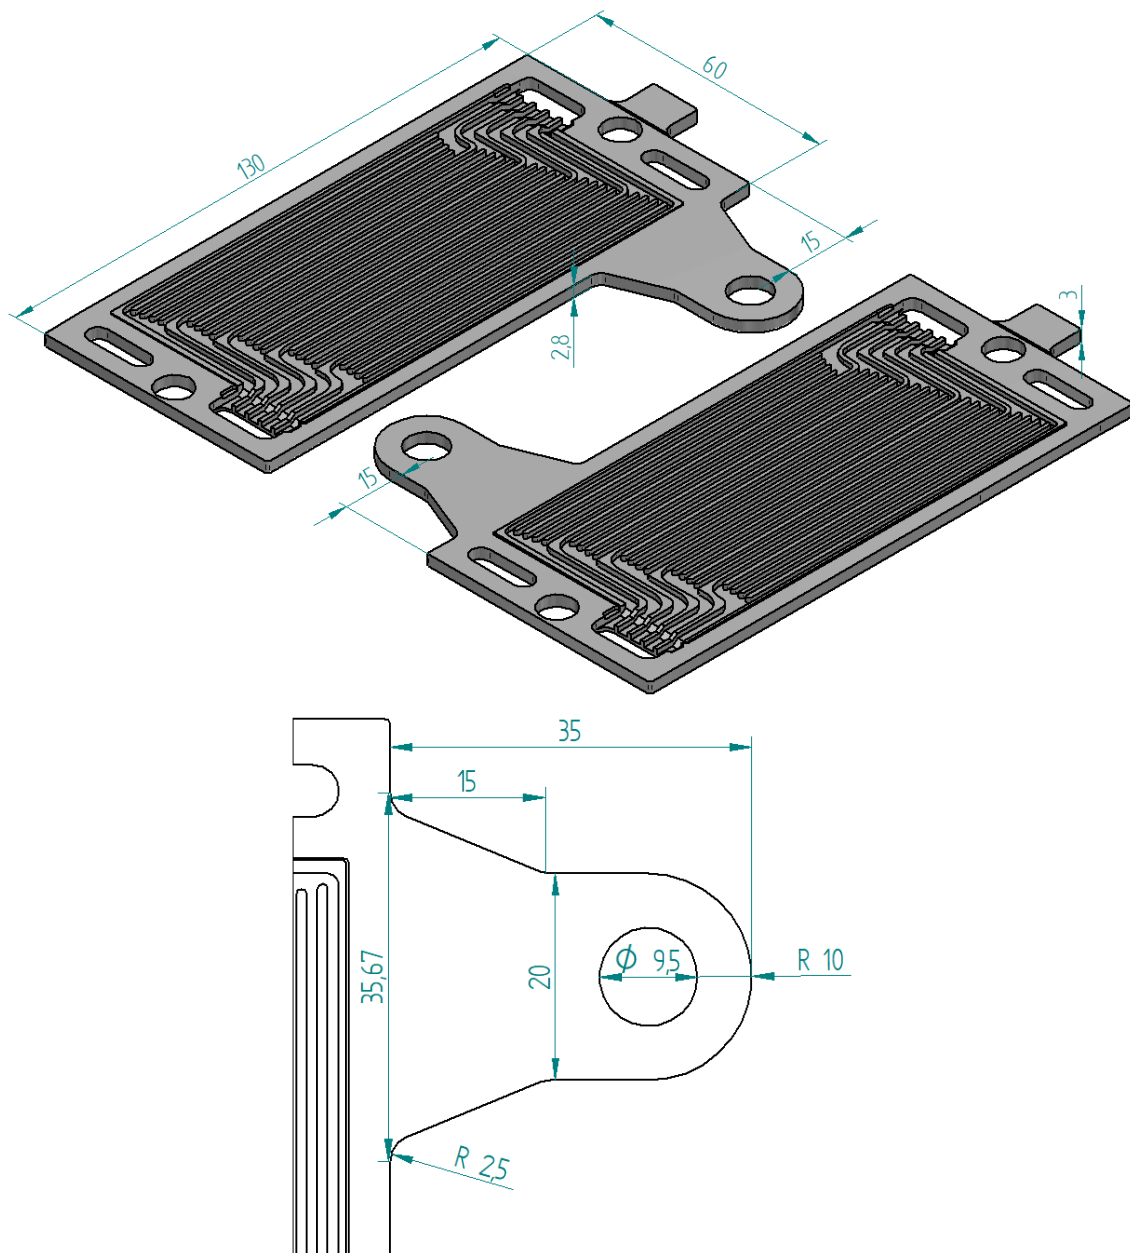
Dimensions of the unipolar plates with terminal, the rest is similar to the bpp in figure A.2.1
